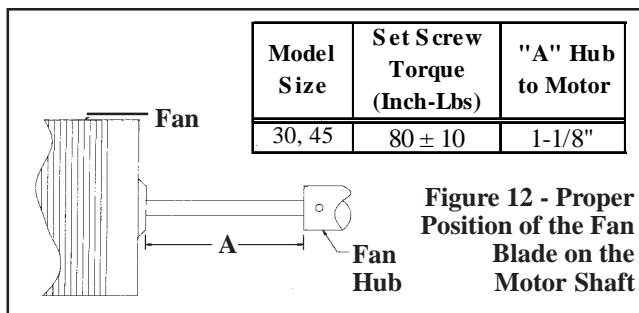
Proper Position of the Fan Blade on the Motor Shaft
